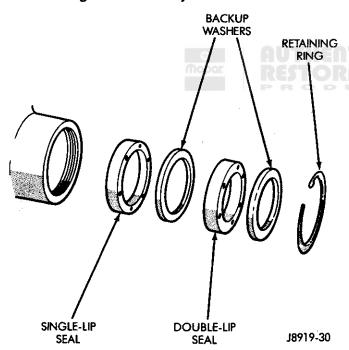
Seals, Backup Washers & Retaining Ring seal simultaneously. Discard the seal and the needle bearing if they are removed by this method.
